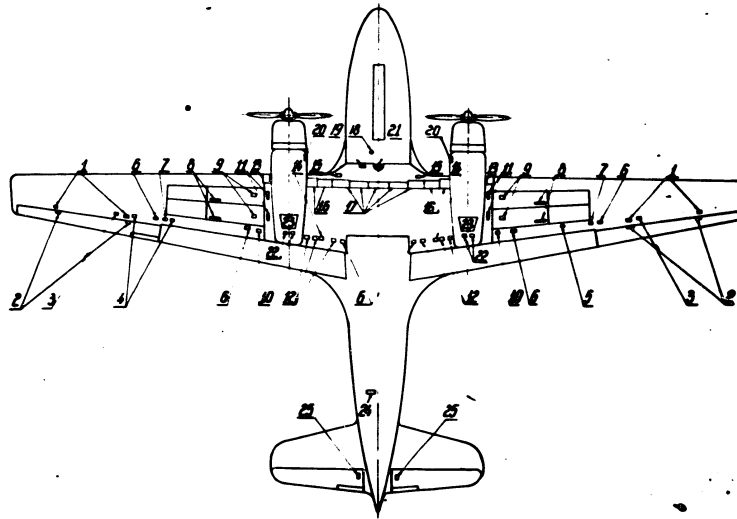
Inspection Doors on the Lower Surface of the Aircraft.
